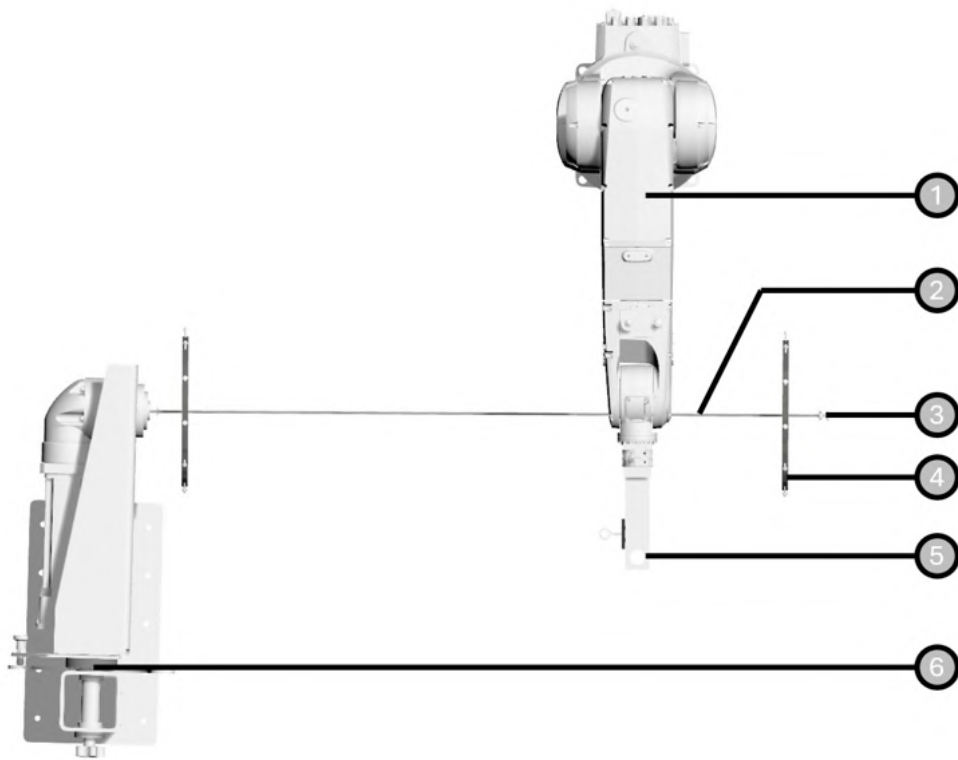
New manufacturing process set-up: (1) ABB IRB 1200-5/0.9 robot (2) Threaded rod (3) Support of threaded rod with bearing nut (4) New aluminium end plate with winding pins (5) New robot end-effector (6) Rotation external axis (turntable).
